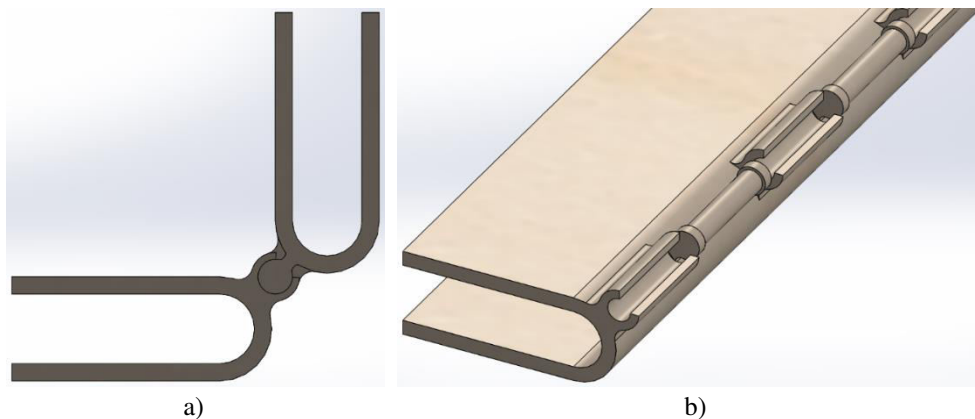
Recyclable hinge for the foldable sides of the wooden crate: a) complete assembly made of b) two equal parts.
